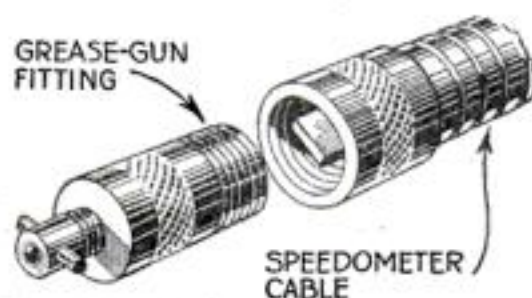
An old grease-gun fitting screwed to speedometer cable shaft helps lubrication
